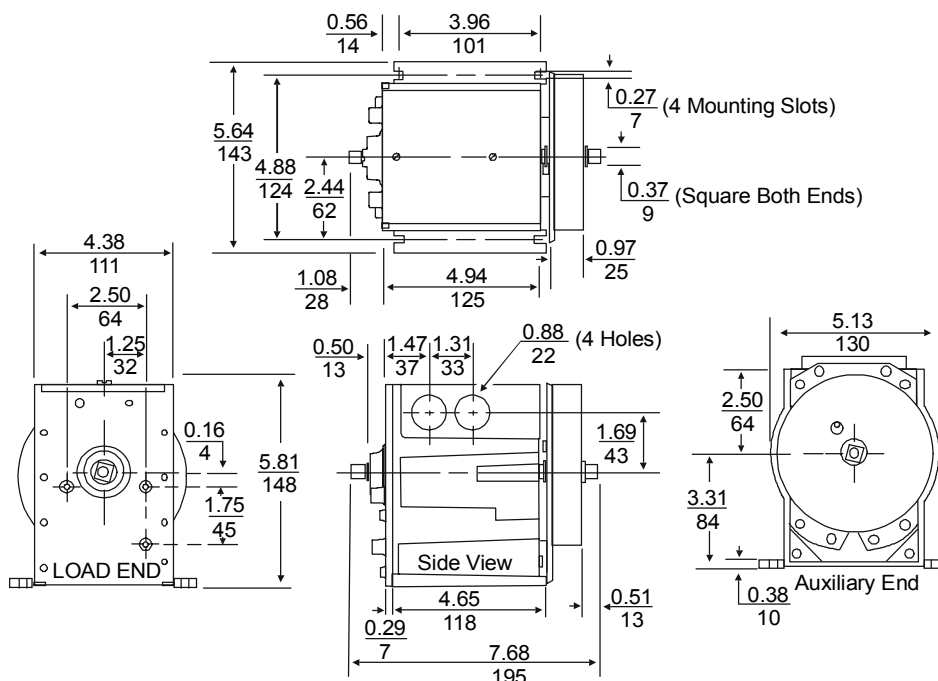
M100 with Spring Return Dimensions, in. (mm)
